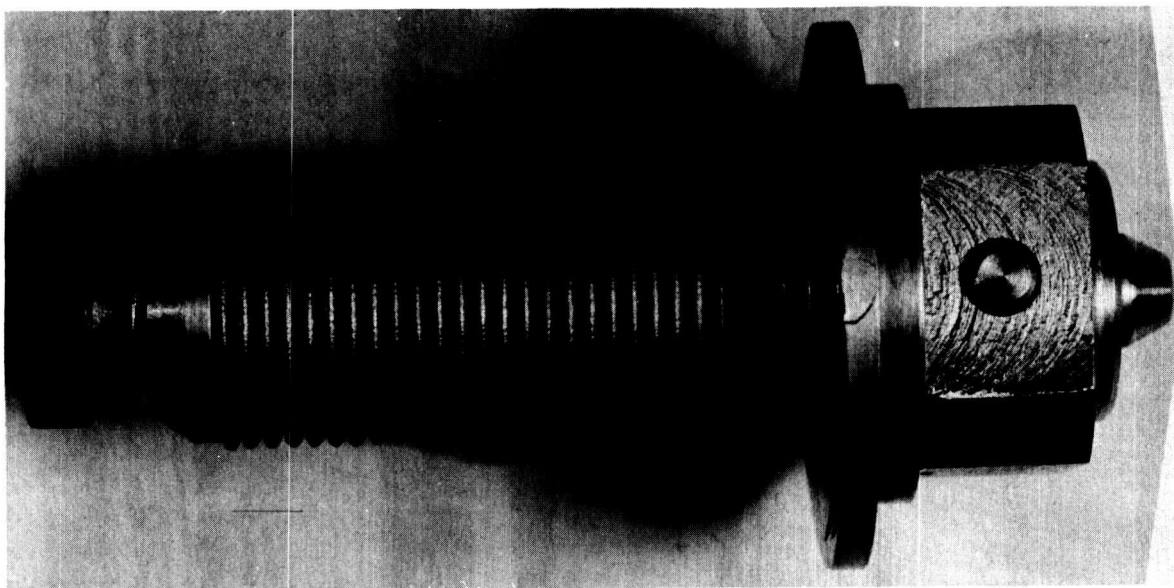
Bellows (Cb-1Zr) and Plug (Mo-TZM) Assembly of Hoke Valve
